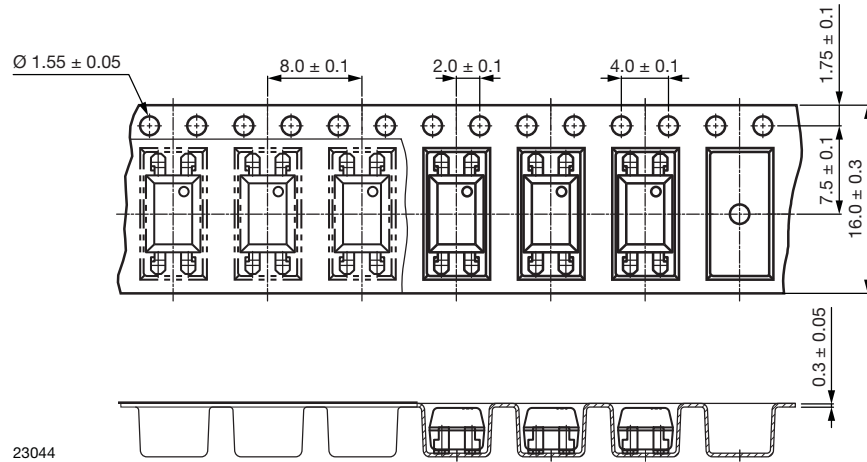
Tape and Reel Packaging (2000 pieces on reel)
